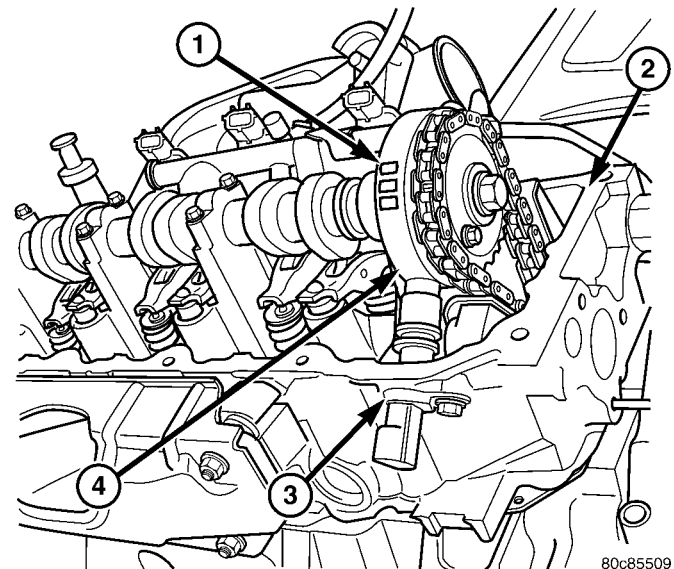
CAMSHAFT POSITION SENSOR LOCATION - 3.7L
